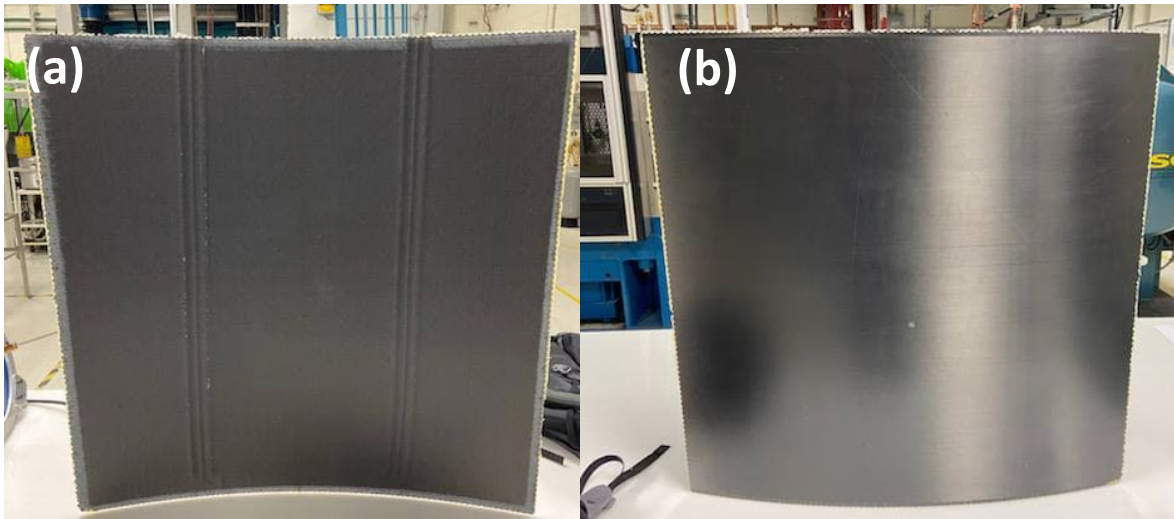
Demolded demonstrator after infusion a. bag side b. tool side
